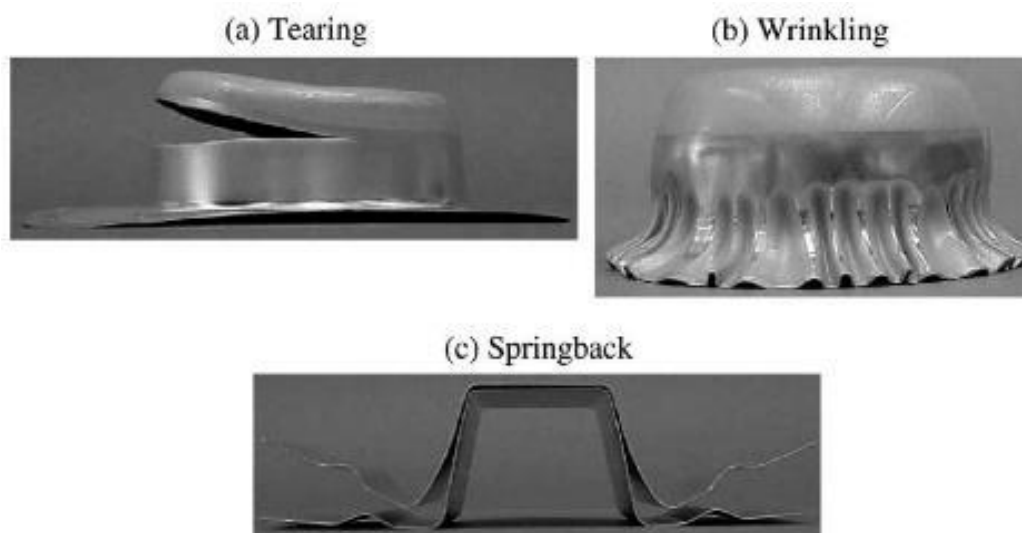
Problems in sheet metal forming (Hsu et al. 2002)
